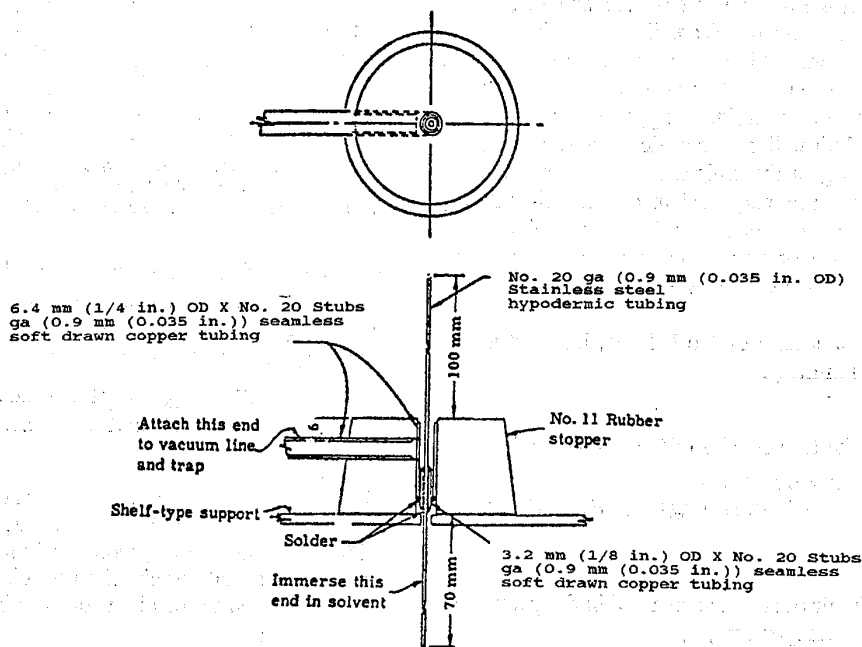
Cleaner Assembly for Bingham-Type Pycnometer
